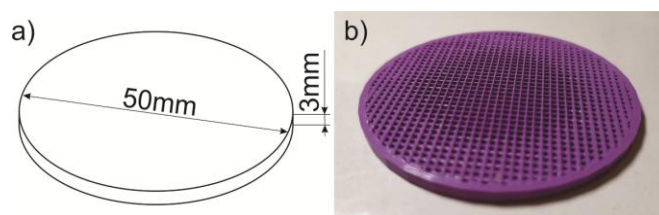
(a) schematic view of the printed sample, (b) printed sample
